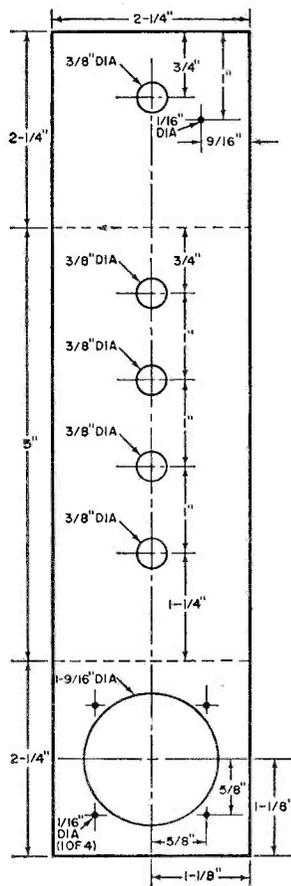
Type of box used and layout are not critical, but make the four bolt holes for the meter a bit oversized to permit rotating the meter if necessary to keep it straight. If you have enough room on your transmitter, you can mount all the parts directly on it, and thus do away with the cable and the box.
